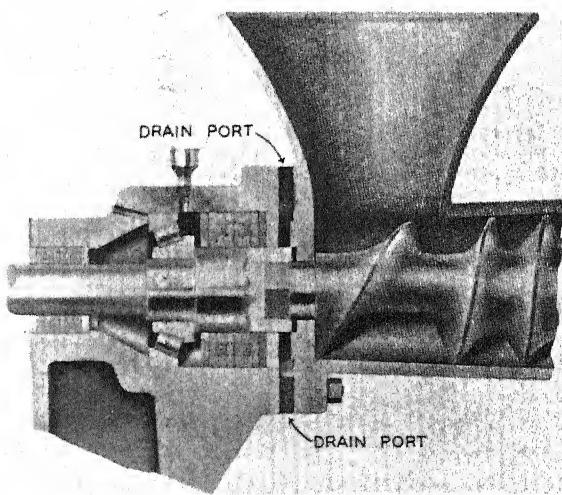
Sectional view of meat grinder showing flange drain port.
